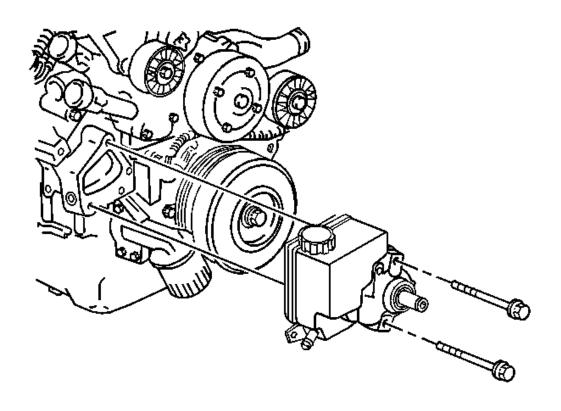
View Of Power Steering Pump And Mounting Bolts Courtesy of GENERAL MOTORS CORP.
